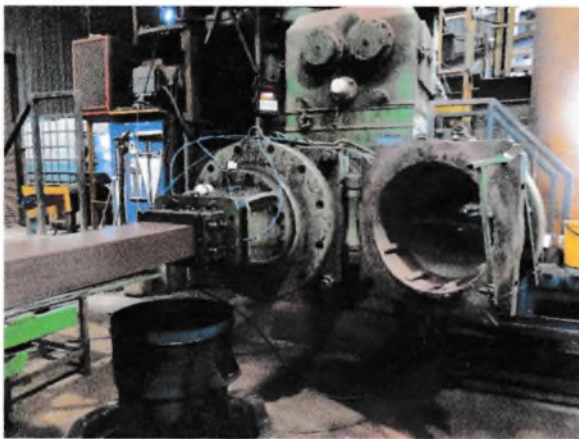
View of the extruder pressure head and die forming the column, with a second pressure head being prepared for a changeover. The second head shows the bridge bar dissecting the oval section. It is this bar the supports the triple-perforation set which the clay flows through to create the perforations contained within the clay column. The internal bars at the front of the rings act as a brake on the rotational movement of the clay within the extruder barrel and assist with clay compaction prior to exit from the extruder mouth. This whole arrangement must be precisely set up to minimise the risk of lamination within the finished brick.
